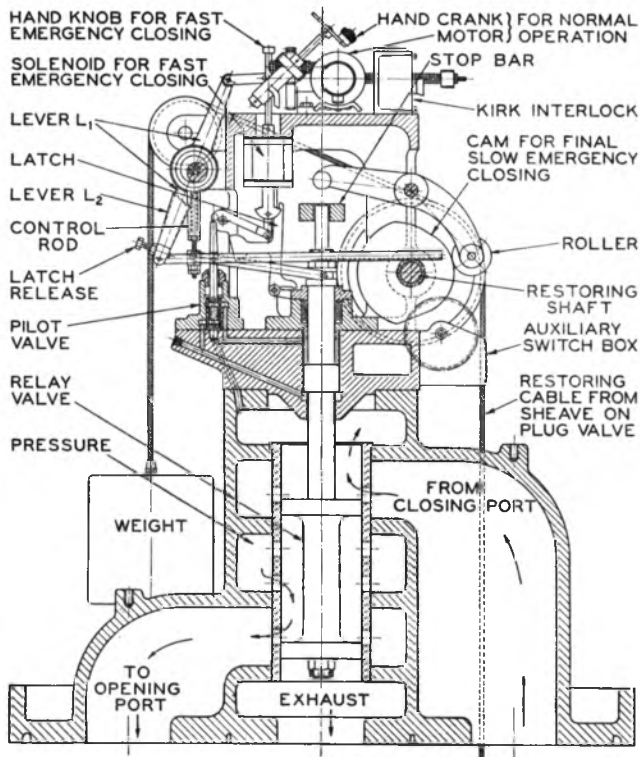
CROSS SECTION OF CONTROL MECHANISM USED ON ALL VALVES; WOODWARD GOVERNOR COMPANY
